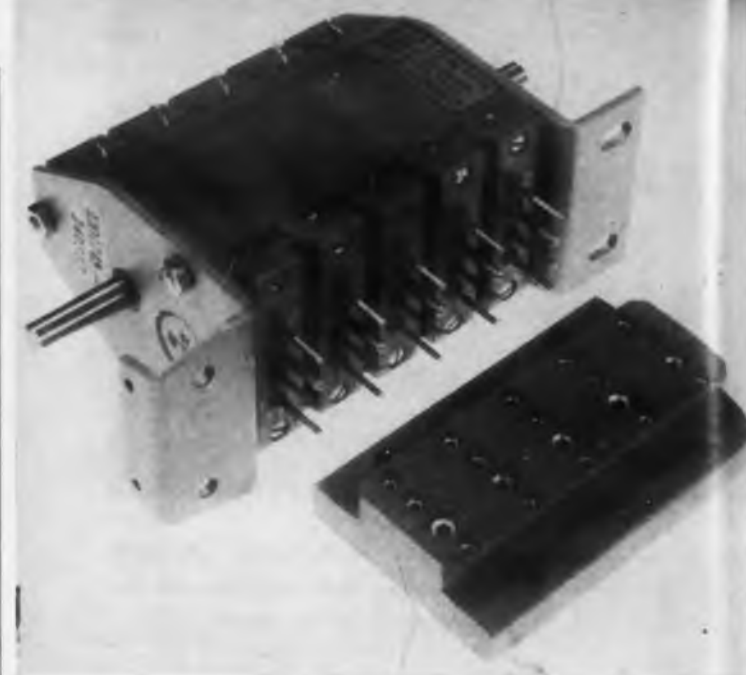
A 5-potentiometer assembly showing the polarizing plug-in base.
